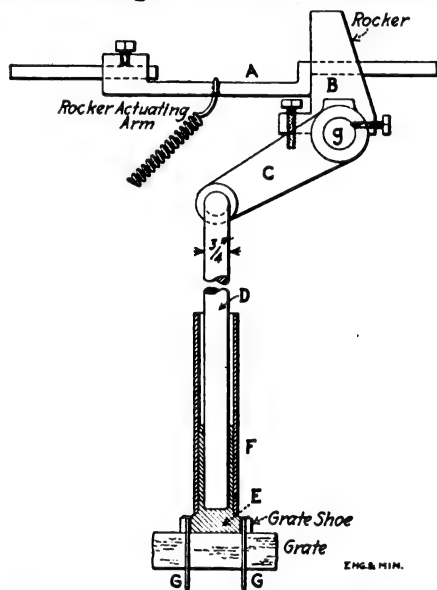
DETAILS OF GRATE-CLEANING MECHANISM.
